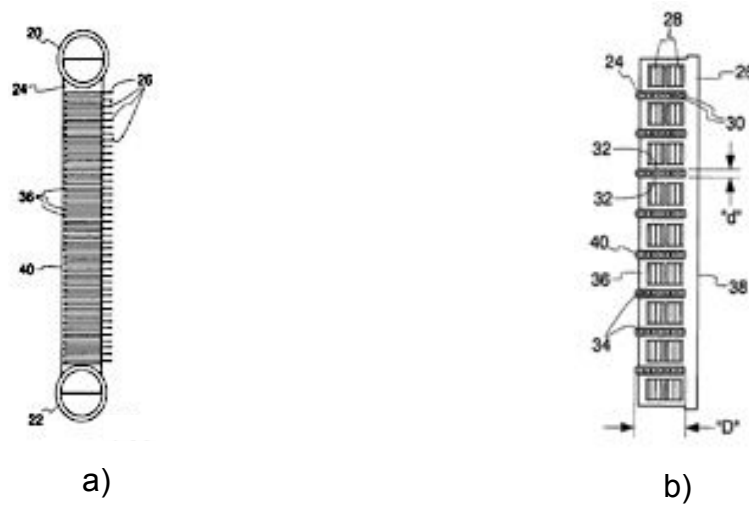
Schematic views of heat exchanger with new fin design: (a) top view, (b) side view.
